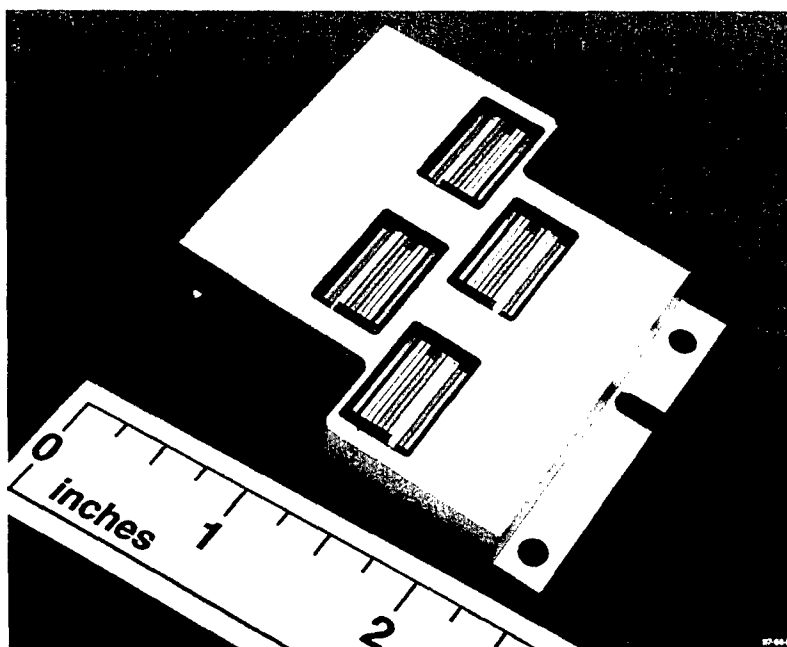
Photograph of populated Sensor Chip Assembly.
